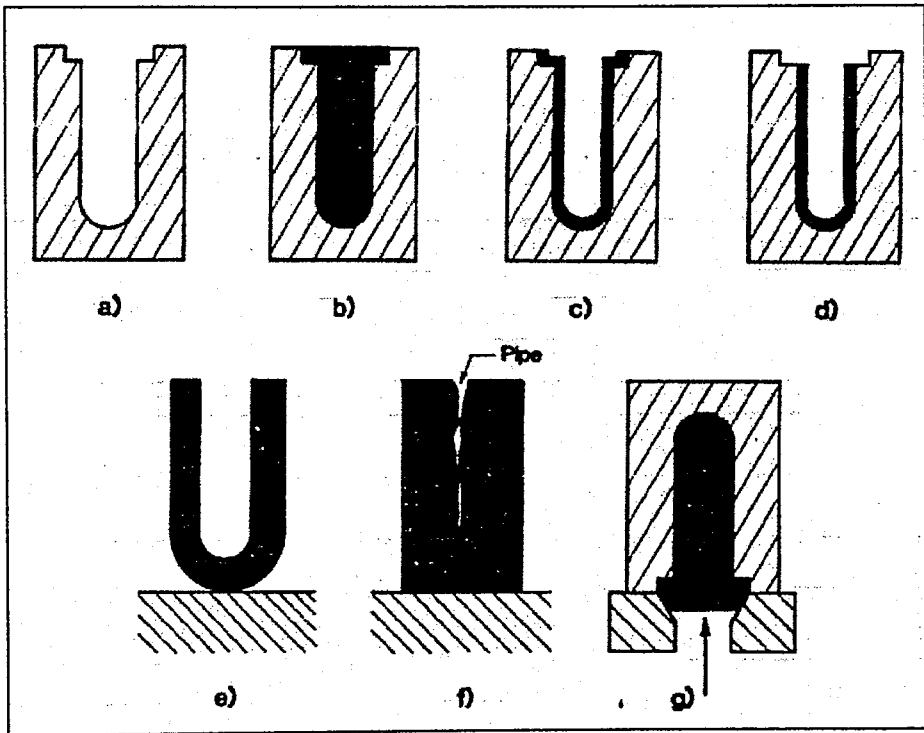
Drain casting (a-e), solid casting (f) and pressure casting (g) [8]
